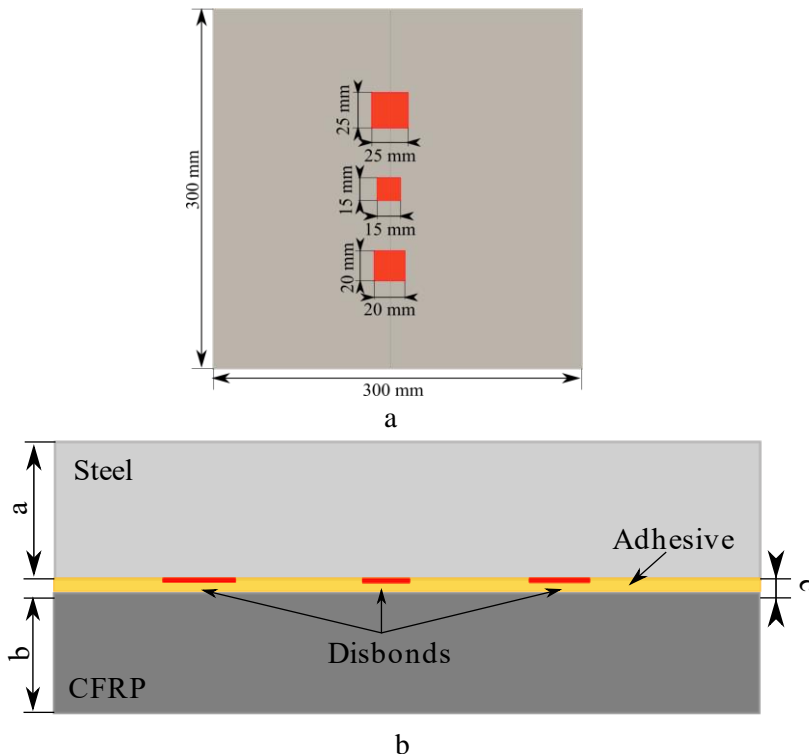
Joint of dissimilar materials of bonded steel-CFRP and defects: (a) top view, (b) cross-sectional view, where a=thickness of steel, b=thickness of CFRP, c= thickness of adhesive layer
